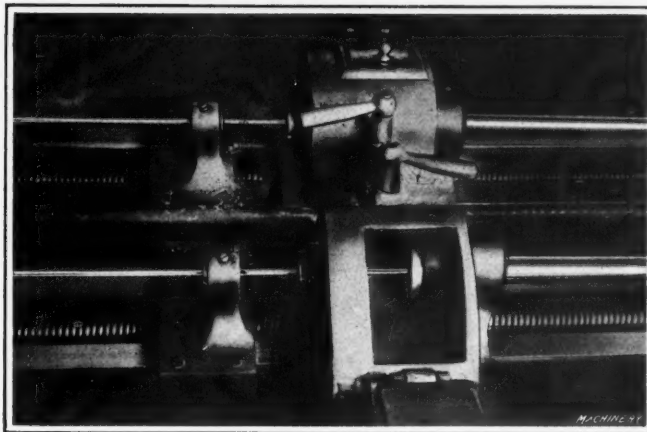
Enlarged View of Drilling Machine showing Carriages
